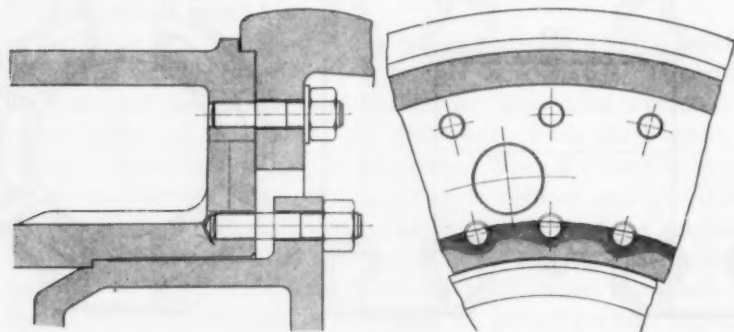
DETAIL OF POINT OF FREQUENT BREAKAGE OF ONE-PIECE GAS ENGINE CYLINDERS
